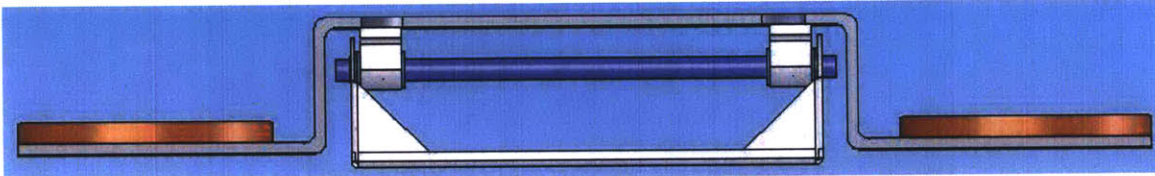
Roll Axis Assembly (lock nuts on the shaft ends not shown)
